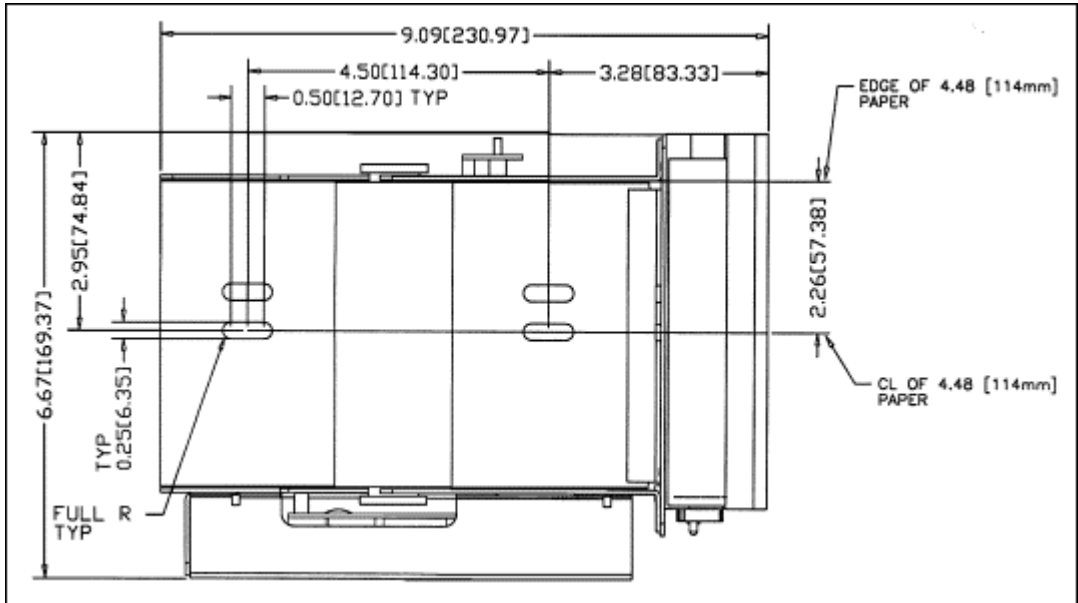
MTP-2232/MTP-2242 Dimensional Drawing with Mounting Holes (Top View)
